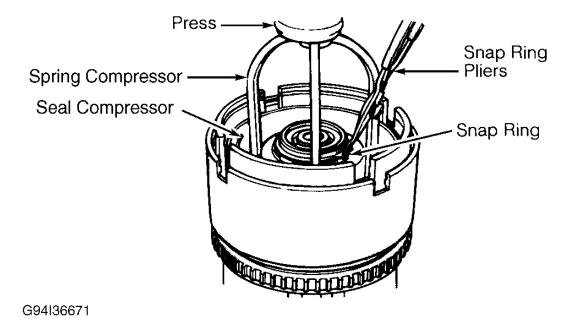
Installing Underdrive Clutch Piston & Return Spring Courtesy of CHRYSLER LLC
